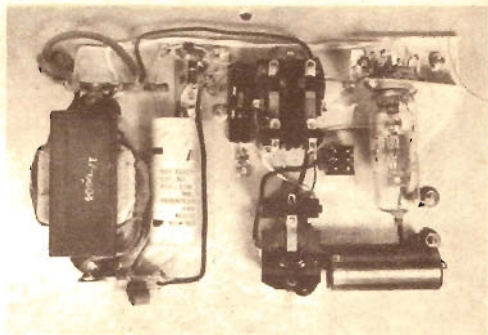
Power-supply panel. Time delay relay RY3 is the tube at the upper right. Its socket is mounted on a small L-bracket made of scrap aluminum.
